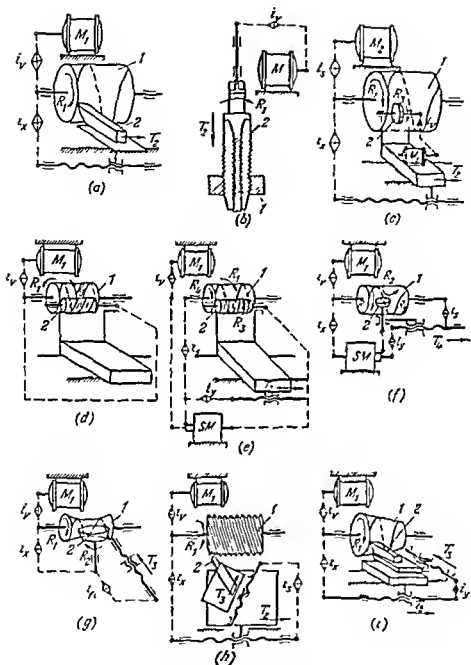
Kinematic structures of thread cutting machines (1—work, 2—cutting tool)
